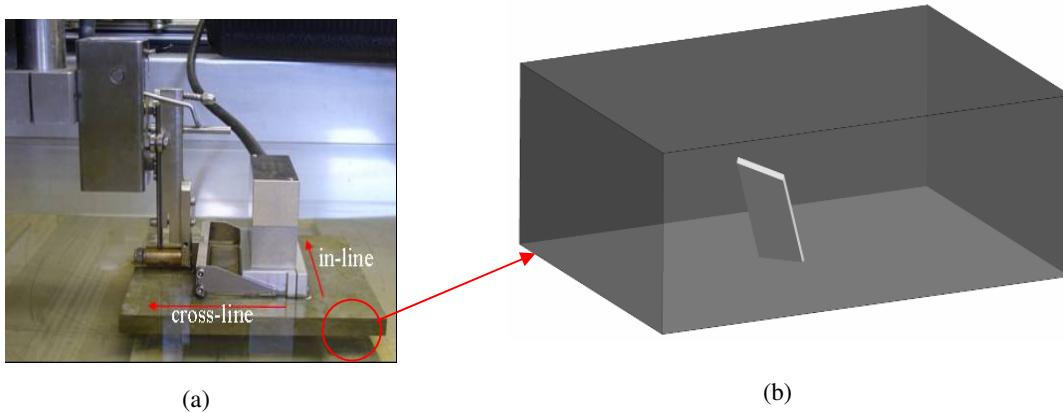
(a) Measurement set-up, consisting of a spring loaded arm fixed to an x-y table. An ultrasonic linear array probe is mounted on the arm. The test piece (steel block) was placed in a water tank to ensure ultrasonic coupling. (b) Test piece with an inclined slit with an oblique tip.
